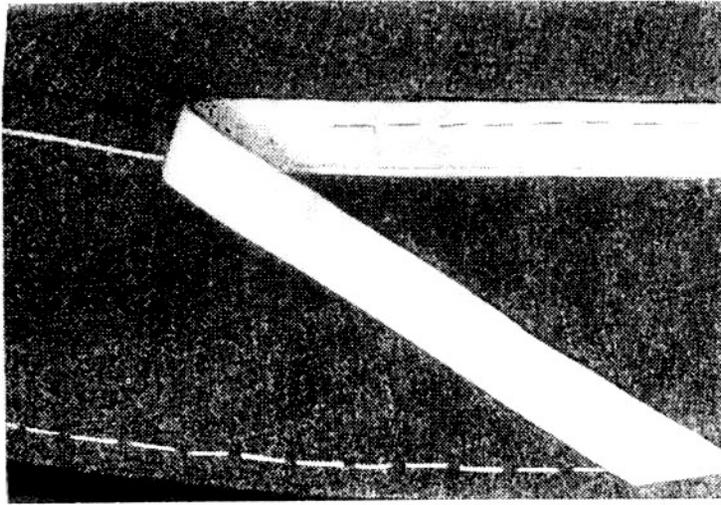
Seam Tape Basted to Hem Edge Before Blind Stitching
